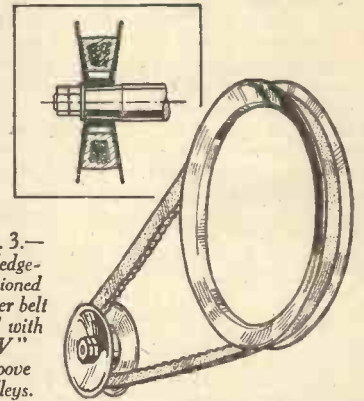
Wedge-sectioned rubber belt used with "V" groove pulleys. Inset, section of belt and pulley.
